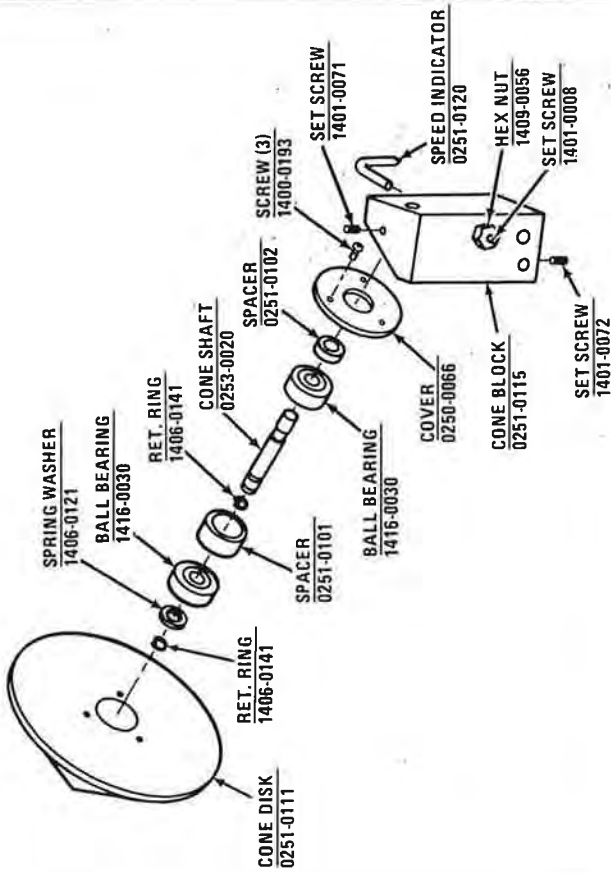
VCM-100 Inner Case Assembly 0252-0002
